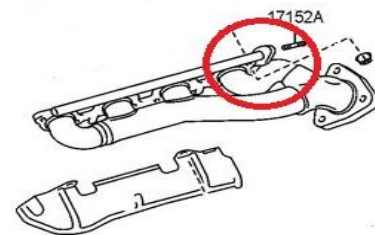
5.7L Exhaust Manifold Air Tube Connection
